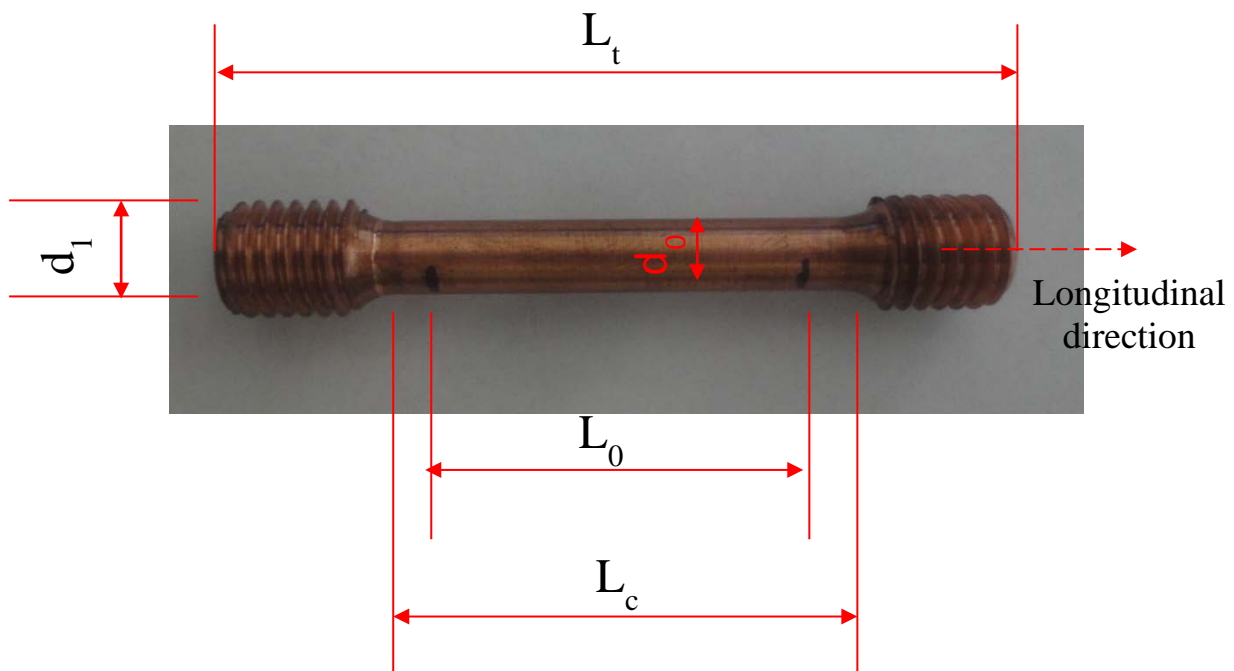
Tensile sample cut from the DHP-Cu tube
